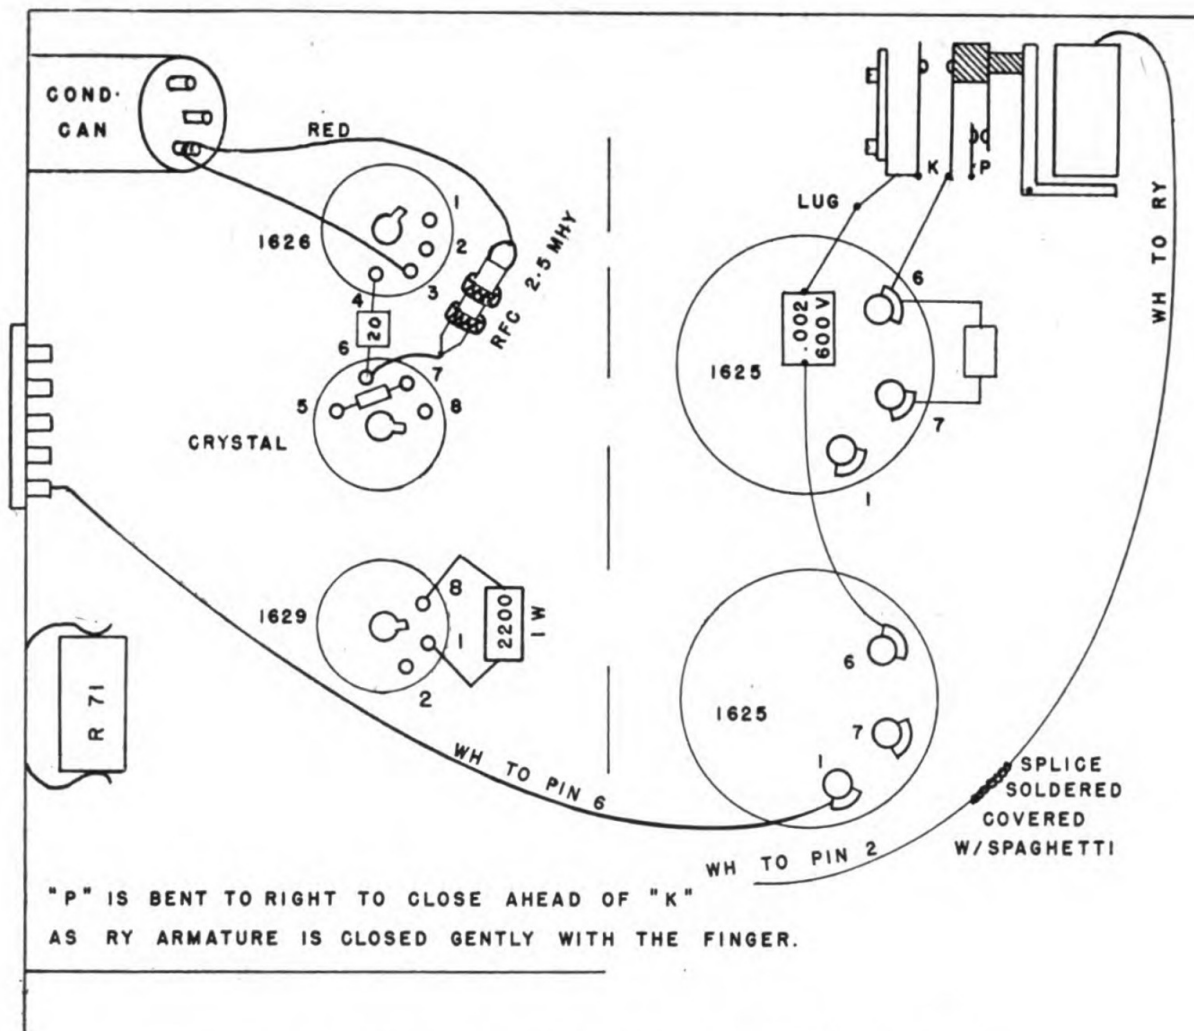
UNDER CHASSIS VIEW AFTER CONVERSION.
